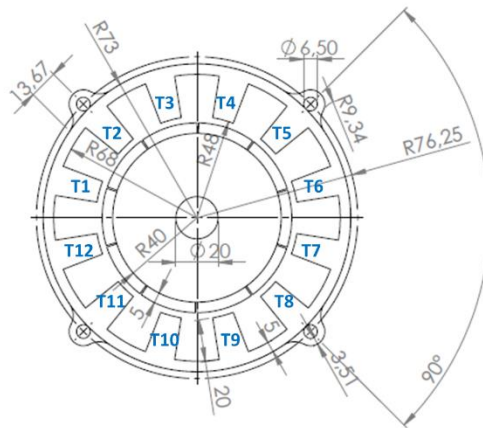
Stator section showing ears in front of tooth n°2, tooth n°5, tooth n°8 and tooth n°11.
